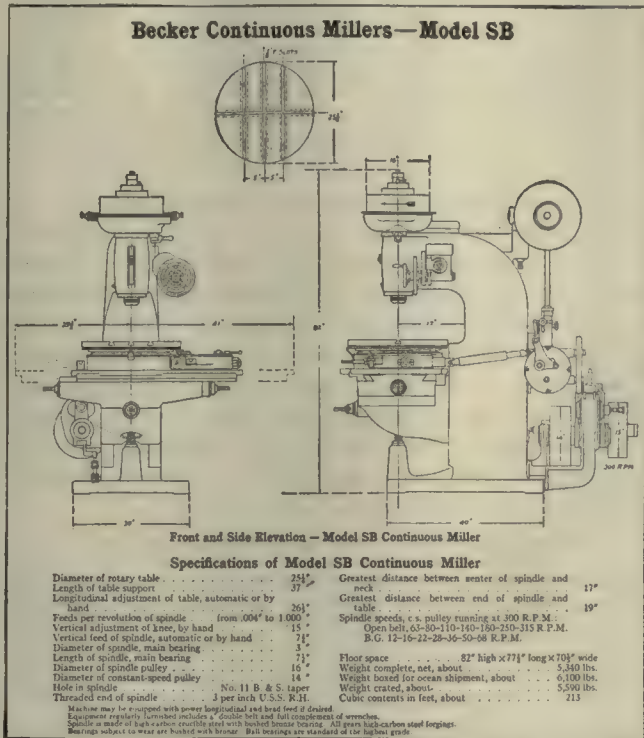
DETAILS FOR TOOL PLANNING FOR CONTINUOUS MILLING OPERATIONS
